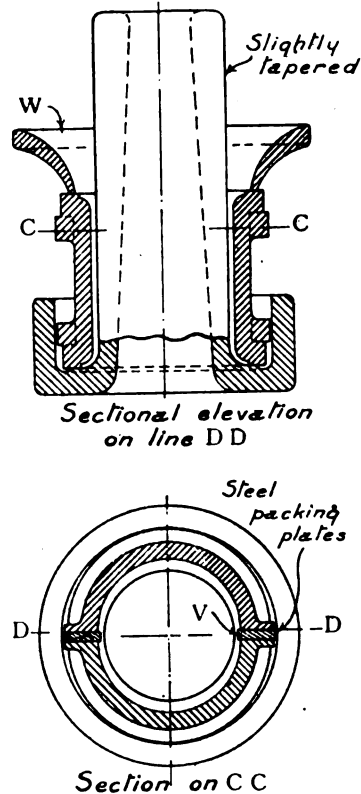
JIG FOR WHITE METALLING BEARINGS.
